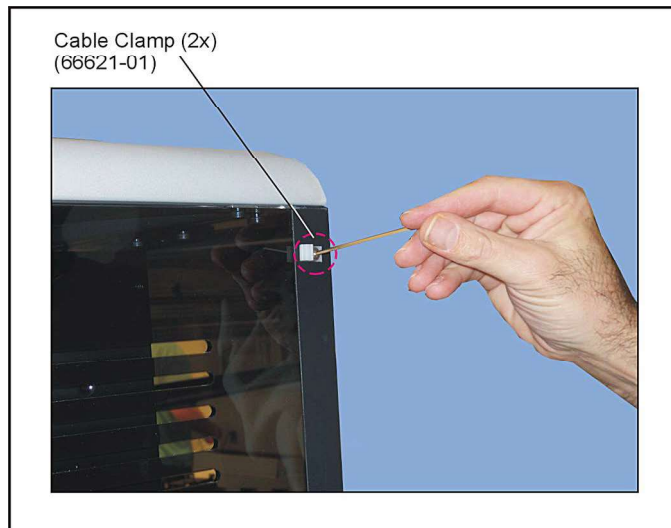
Installing two cable clamps (view is from the rear of the instrument)
